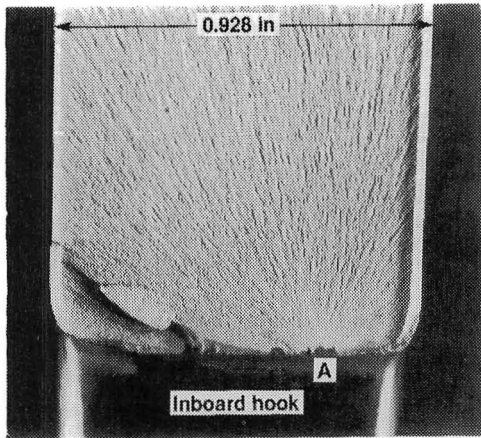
Fracture surfaces of B-52 pylon rear hooks (A indicates the primary crack initiation sites).
